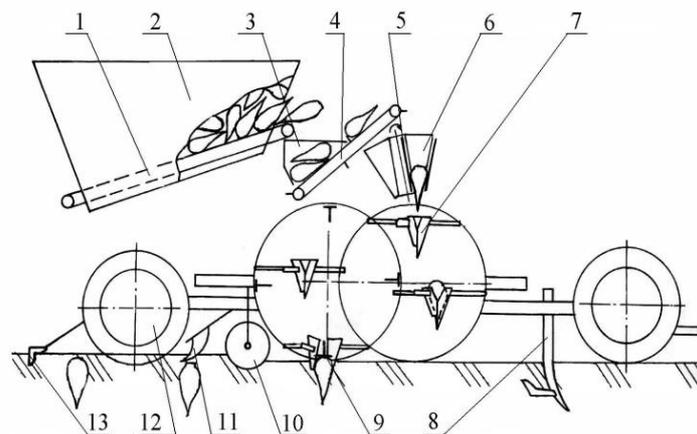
Functional diagram of the machine GAP a 2.8 with guiding surfaces: 1 – conveyor hopper; 2 – bunker; 3 – tray-drive; 4 – conveyor-feeder; 5 – guiding surfaces; 6 – drag conveyor; 7 – cone of the planter; 8 ripper; 9 – pusher; 10 – gauge wheel; 11 – coverer; 12 – roller wheel; 13 – loop.
